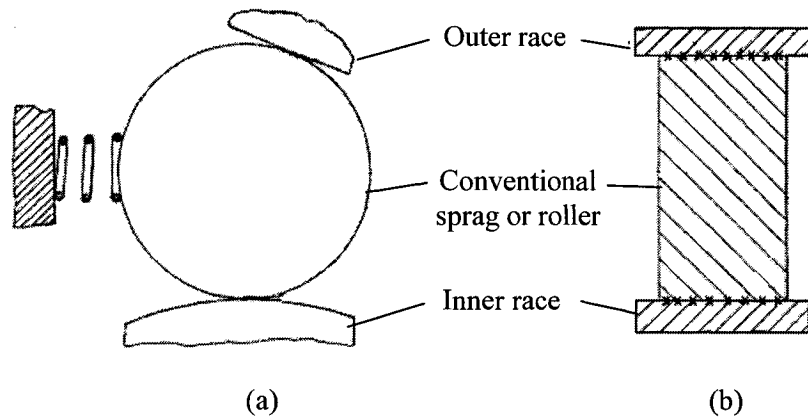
(a) A side view of a roller in a conventional roller-clutch; (b) a front view of the roller reveals a line contact between the roller and the inner and outer races (adapted from [46]).
